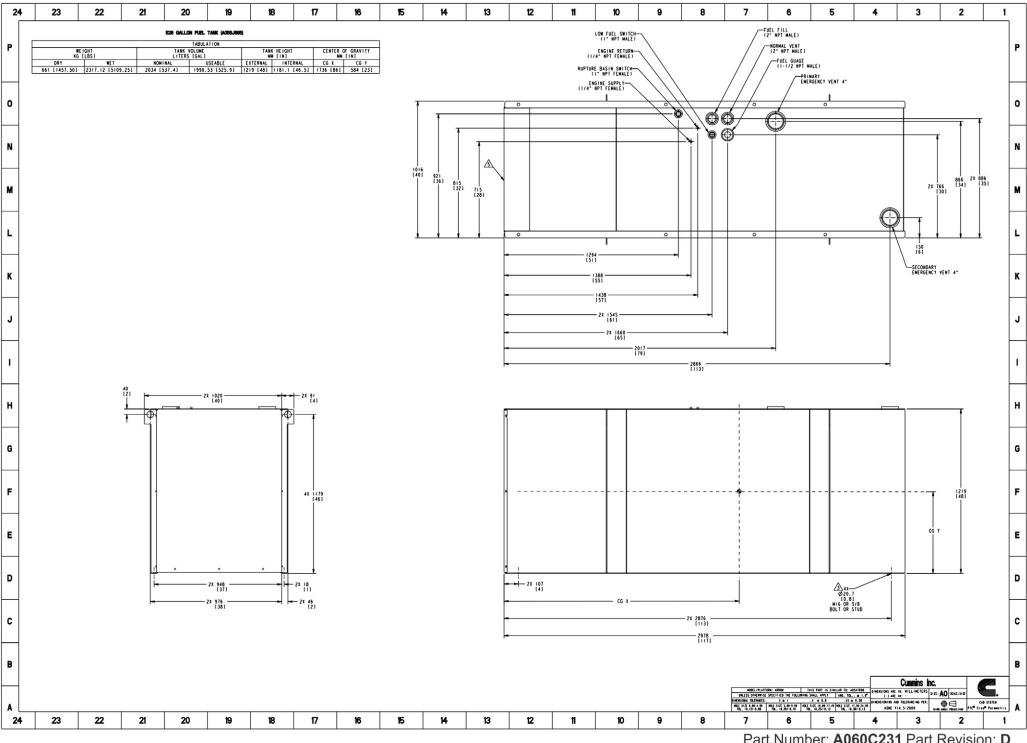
TANK OUTLINE DRAWING (SHEET 3 OF 5)
